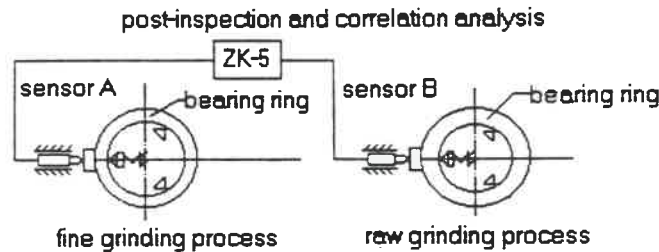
correlation inspection in the final internal centerless grinding process of the internal ring bearing.
